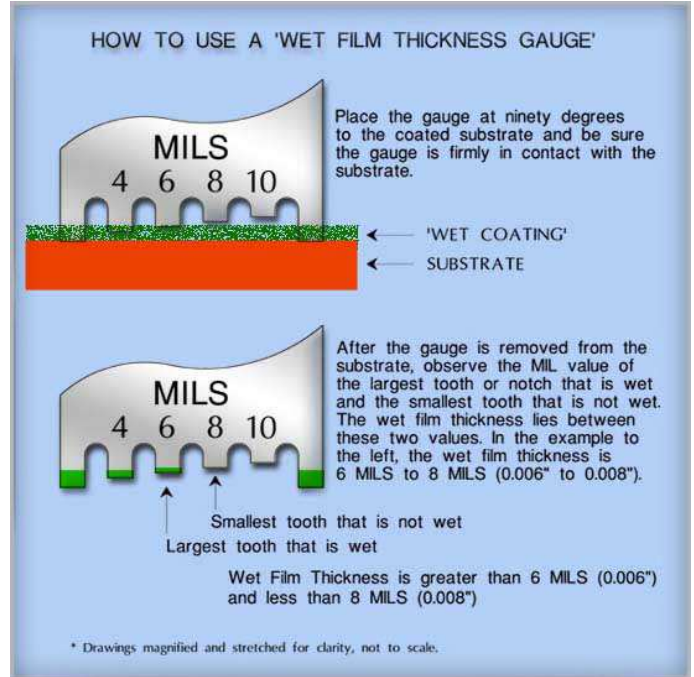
Details on measuring WFT using a notch type wet film gauge. Image courtesy of [www.geionline.com](http://www.geionline.com).
